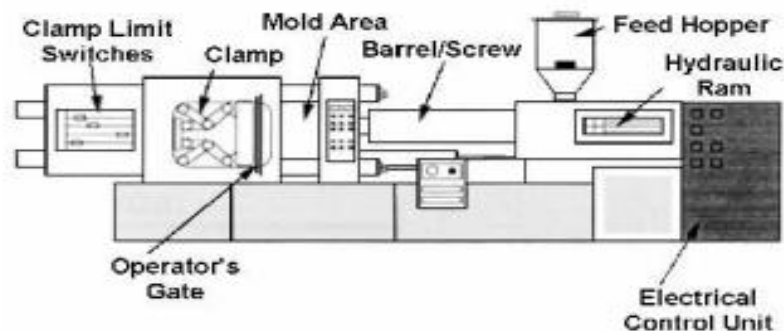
Injection molding machine example (Ebnesajjad 2003)
